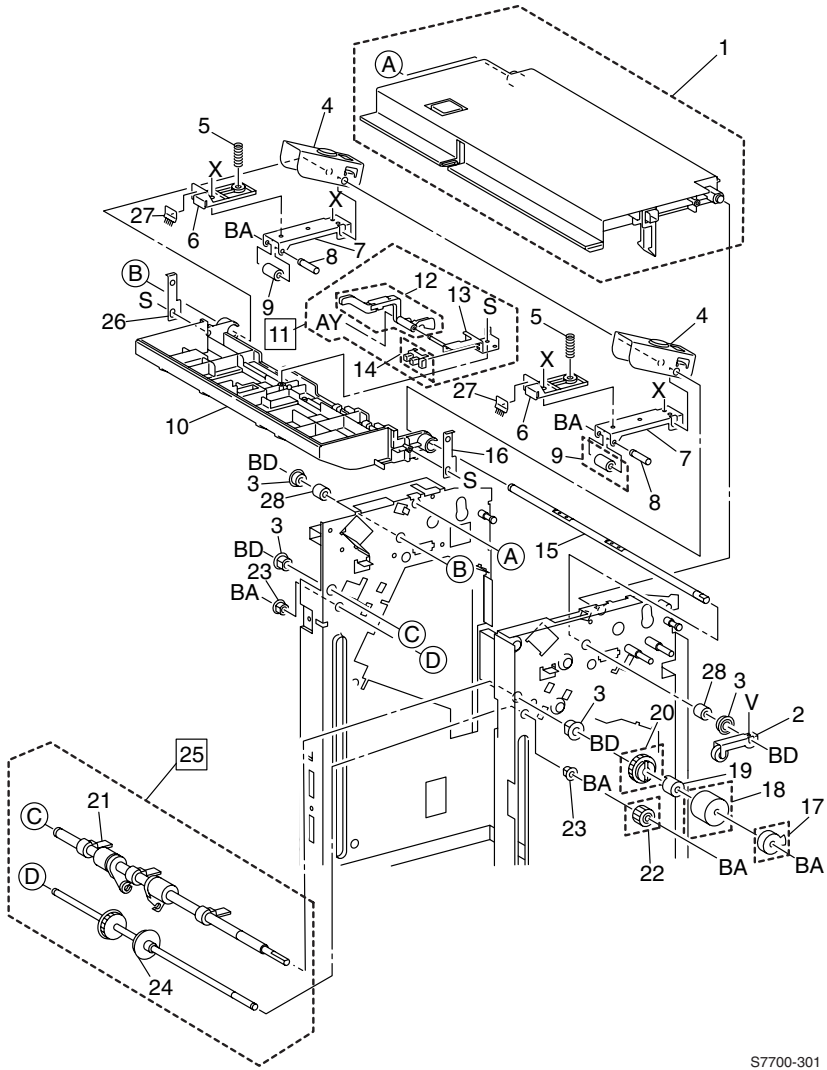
Horizontal Transport Assembly FRUs (cont'd.)
